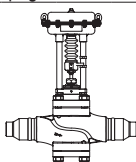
with butt weld ends: Spring opens on air failure
